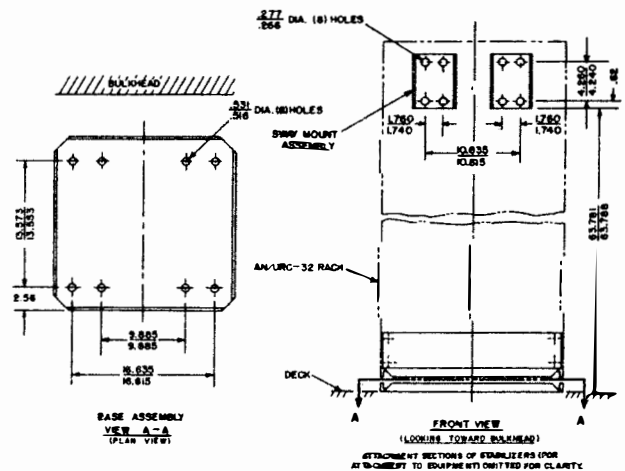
Mounting Hole Location for Earlier AN/URC-32 Version
